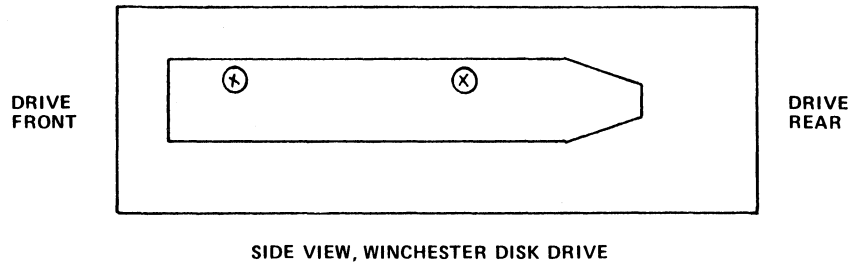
Removing Disk Drive Slide Rails, A and B Cables and Brown/Red LED Wire
